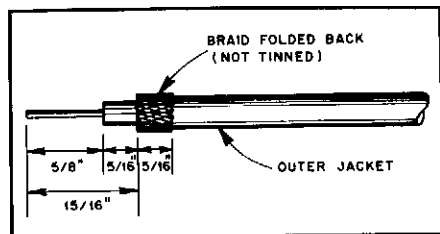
Cable prepared for connector mounting per KG6QY's suggestion.
